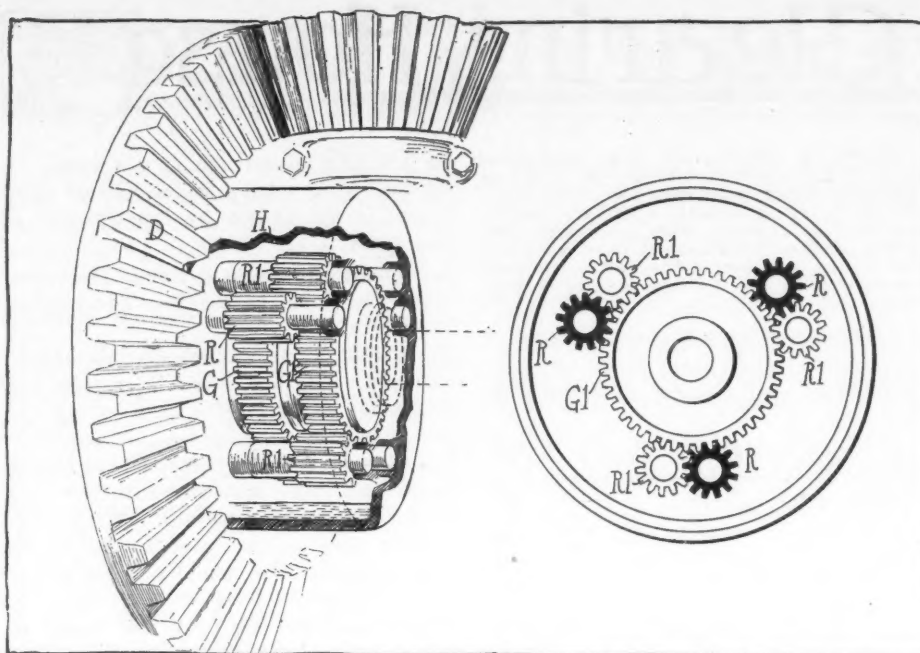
SHOWING DETAILS AND OPERATION OF SPUR GEAR DIFFERENTIAL
